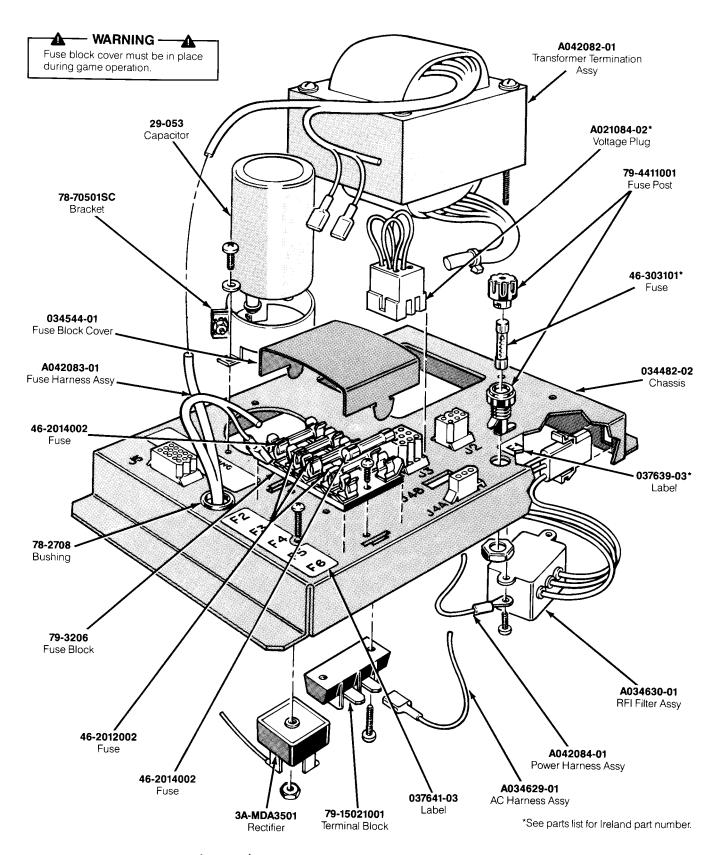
Linear Power Supply Assembly US-Built A042081-01 A Ireland-Built A042081-02 A
